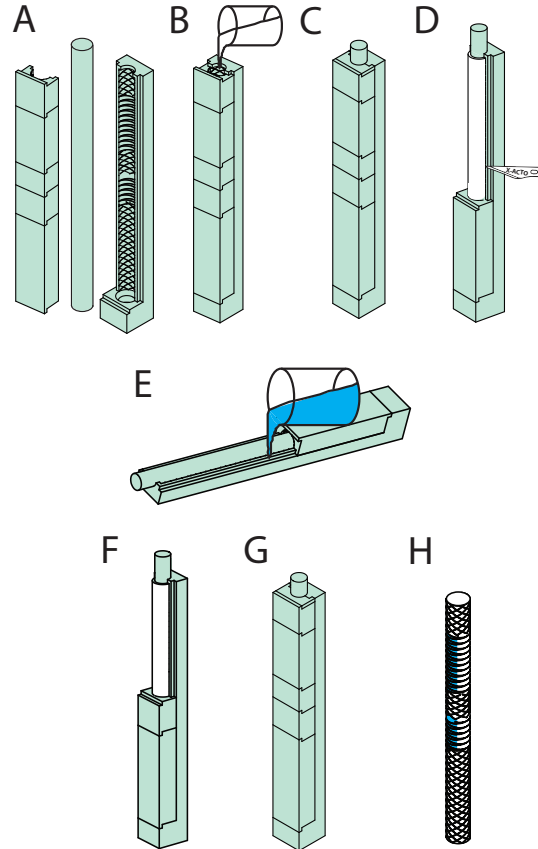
Fabrication of a segmented actuator. (A) A metal rod and 3d printed mold are used to mold the elastomer. (B) First, Elastomer 1 is used to make the entire actuator. (C) Elastomer 1 is left to cure. (D)-(G) The elastomeric segments are fabricated one by one. (H) The mold is removed and the actuator is capped with Sil-Poxy.
